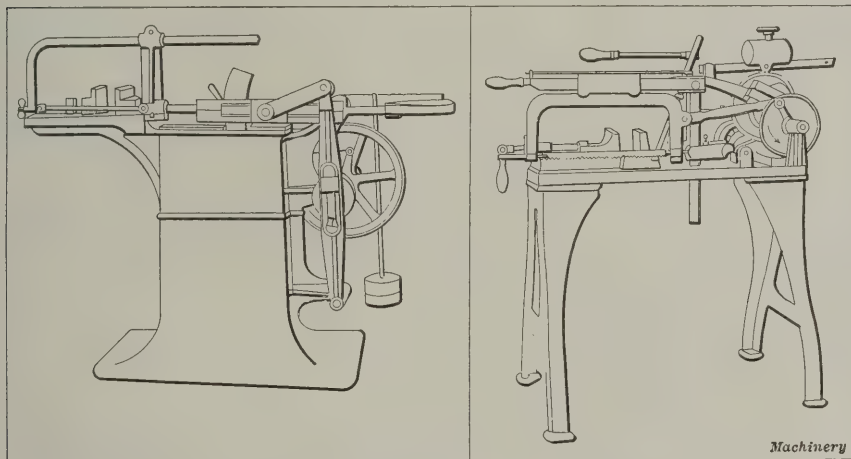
The Eureka Hacksaw Machine. Fig. 4. The Milford Machine, an Improved Type
